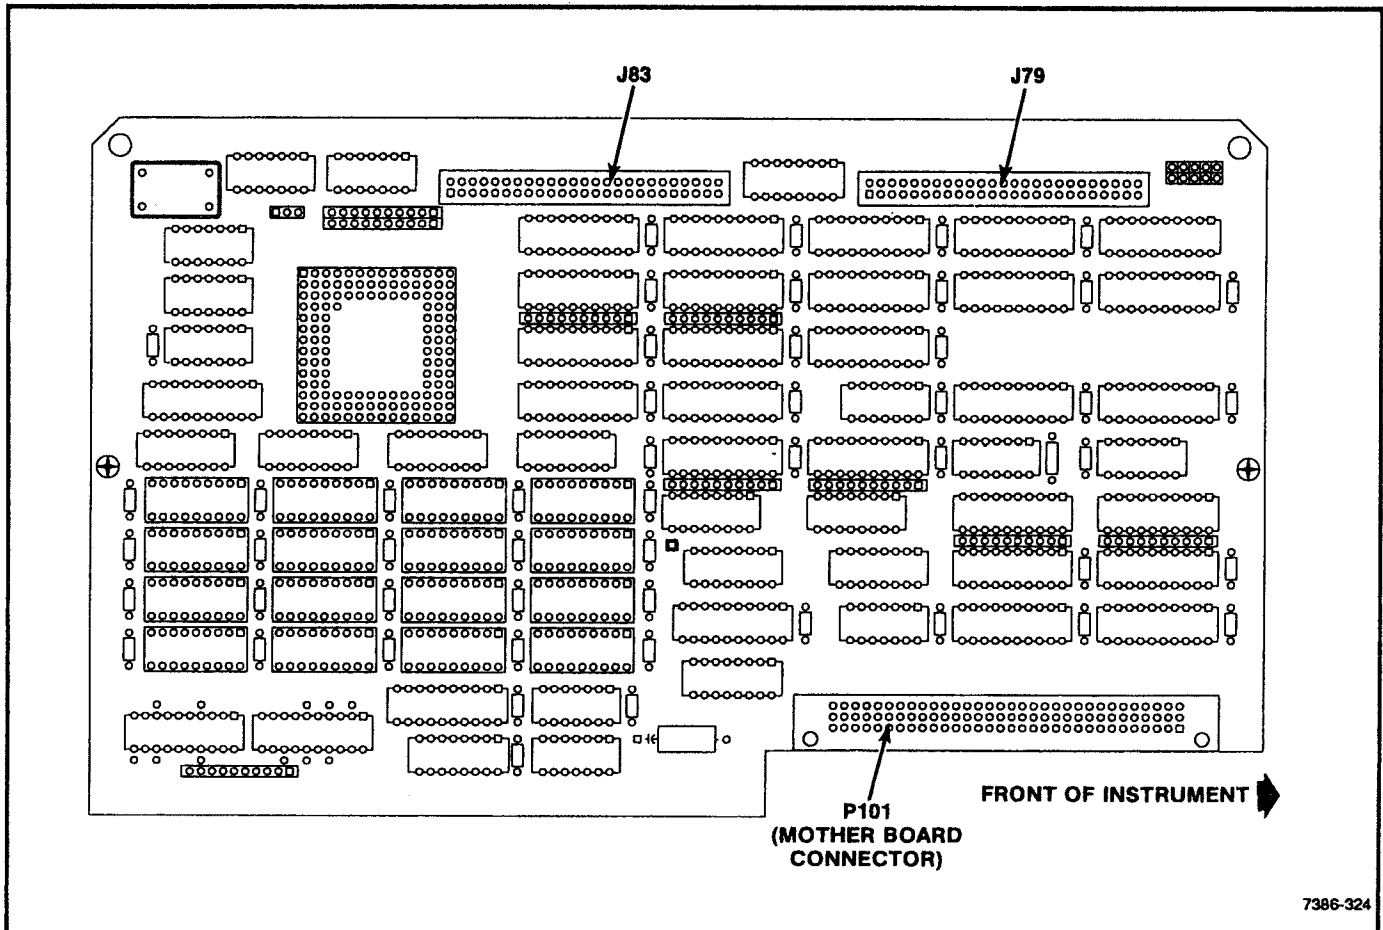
Connector locations for removal of the A15 Memory Manager Unit board.
